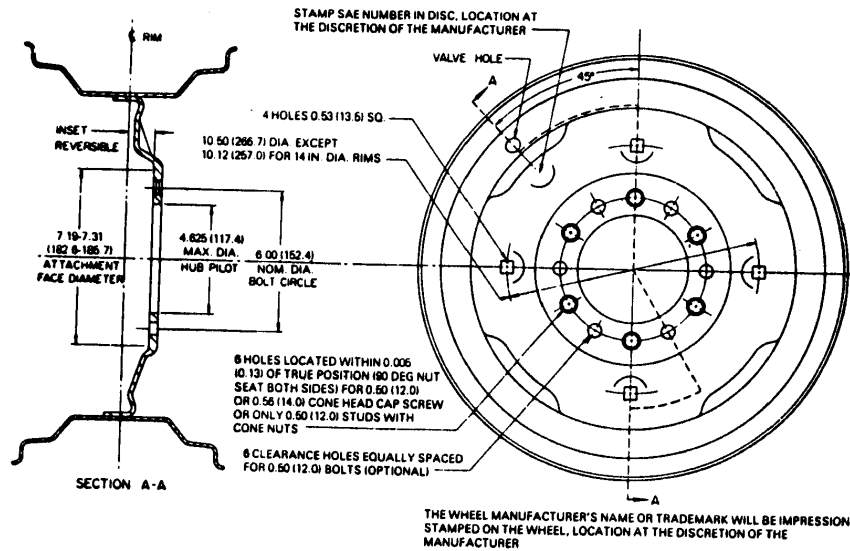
6 BOLT, 6 IN. BOLT CIRCLE GROUP
